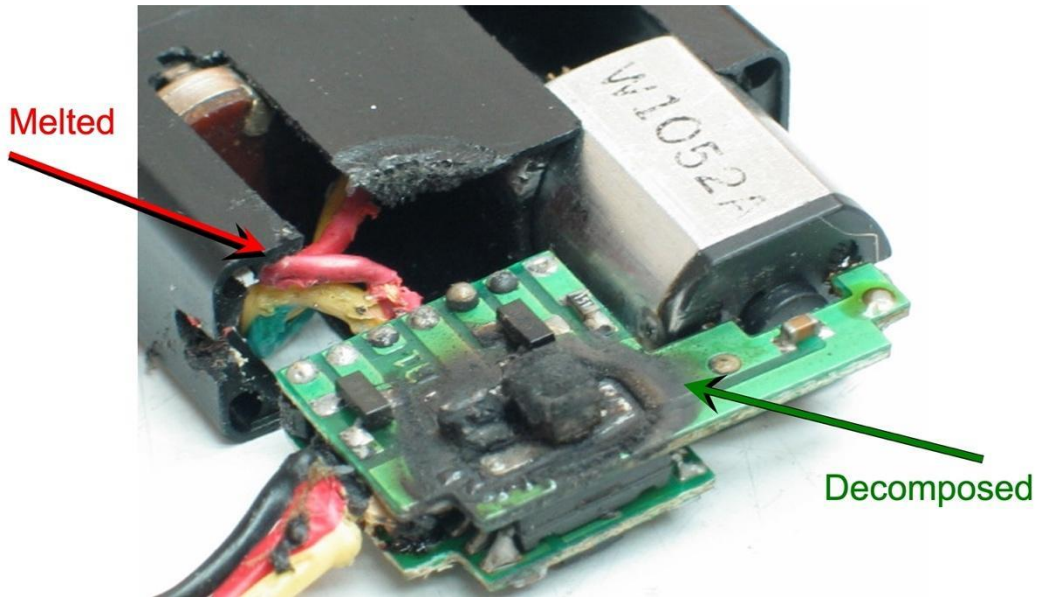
Electrical assembly demonstrating overheated thermosets and thermoplastics
